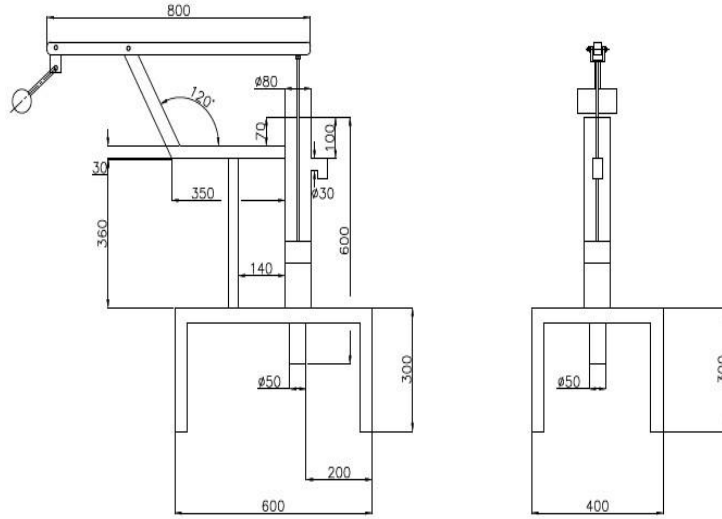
2D Model of Hand Water Pump with Pendulum (front view and side view)
